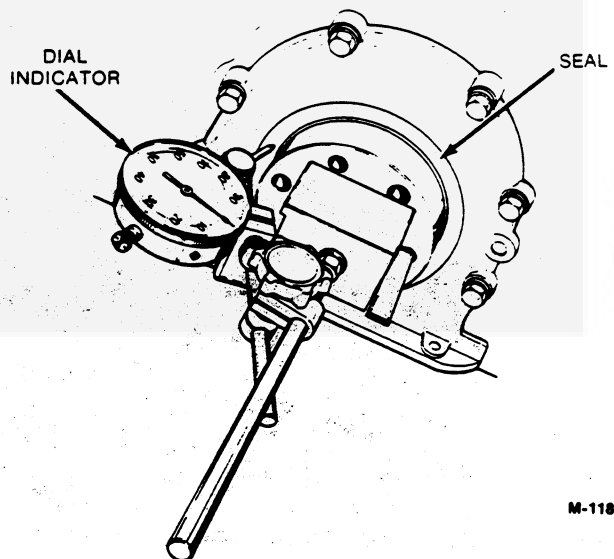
CHECKING CRANKSHAFT TO SEAL RUNOUT
